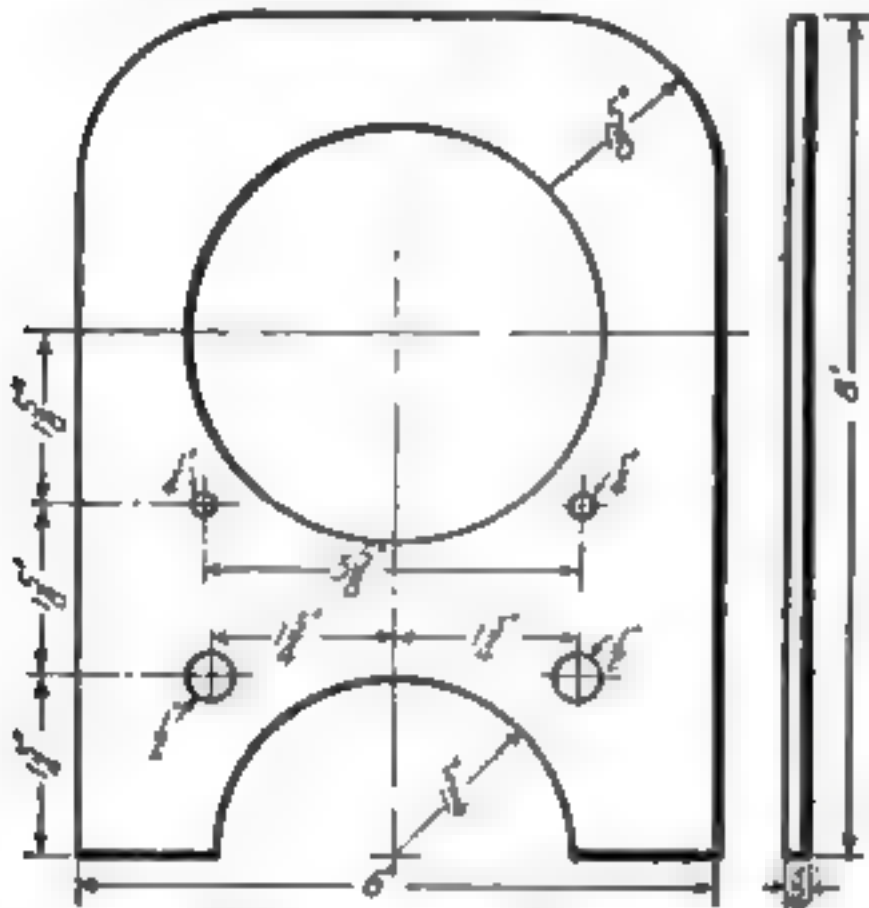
Dimensions of the upright which serves to carry the light-shield
